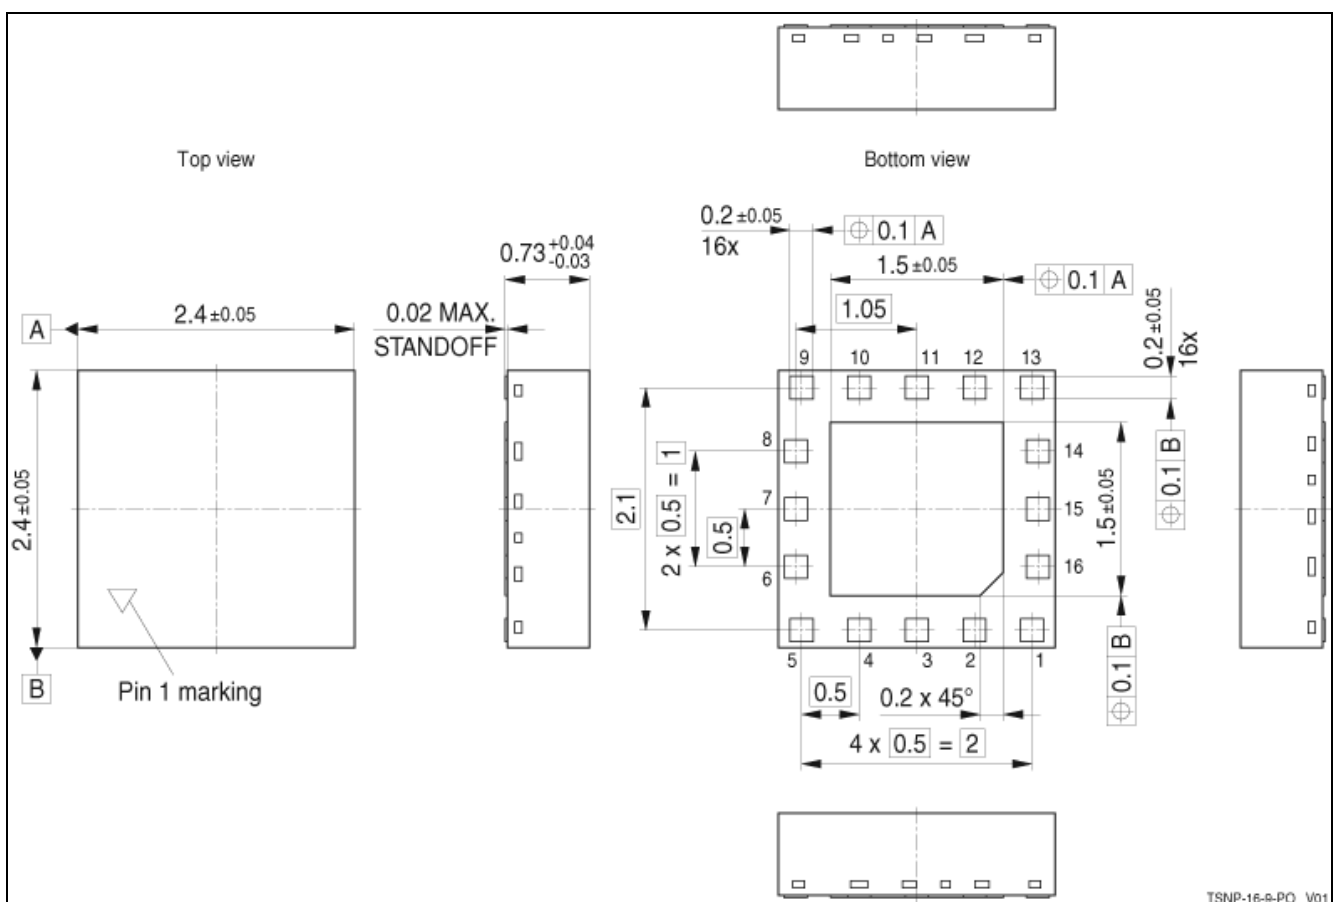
Package Outline (top, side and bottom view) of TSNP-16-9
